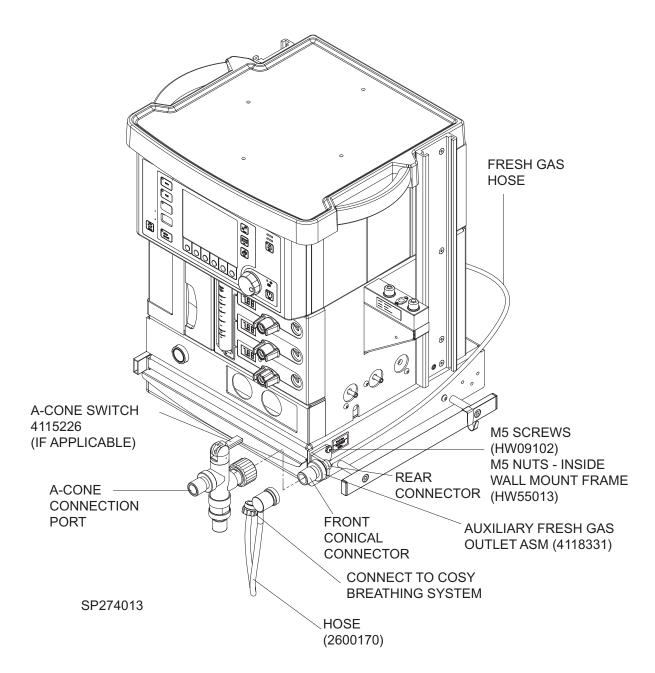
Right Side Wall Mount Auxiliary Fresh Gas Outlet Installation
